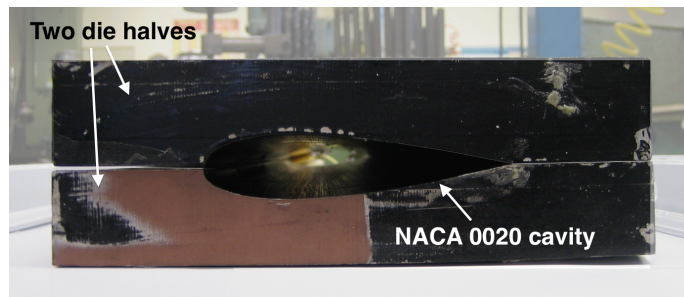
End-on view of the two die pieces which form the NACA 0020 mould cavity.
